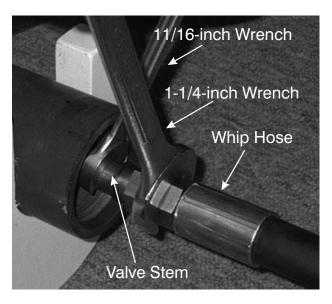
Loosen Hex Fitting and Remove Whip Hose
